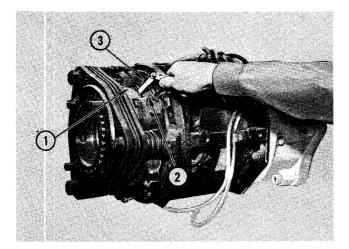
CHECKING MOTOR BRAKE CLEARANCE 1. Floating Plate 3. Feeler Gauge 2. End Bell
